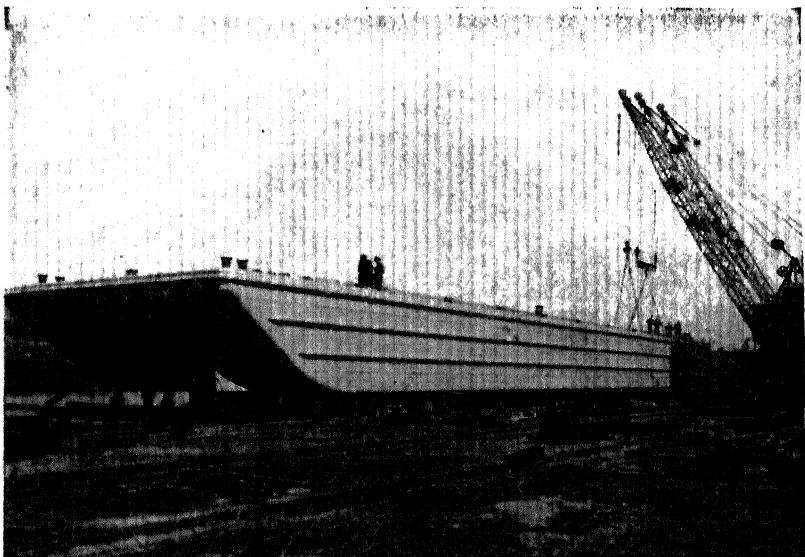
Welded steel dump scow ready for installation of machinery. Capacity: 1200 cu. yds.
